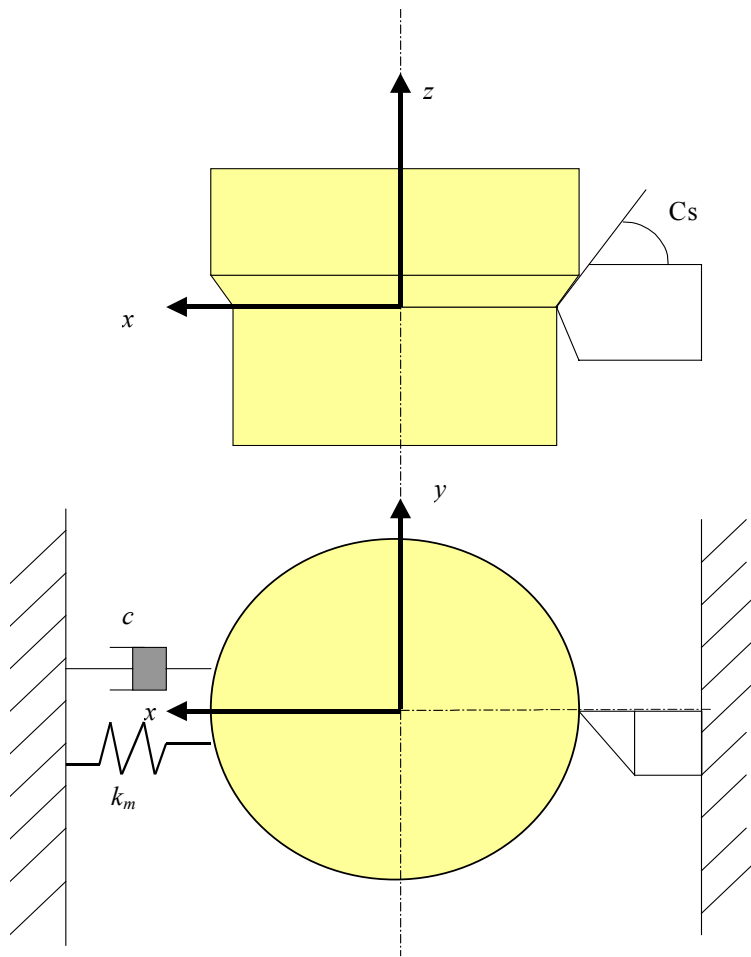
Schematic diagram of the tool-workpiece system in straight turning
